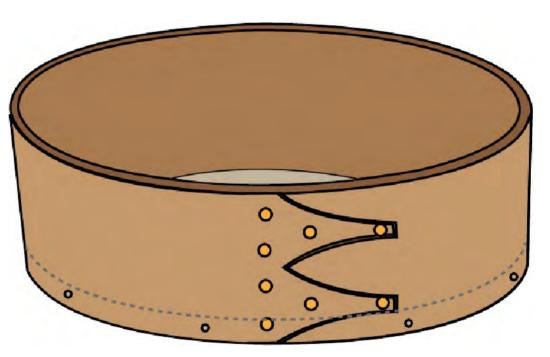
Mark the Band. Make a pencil mark where the pieces overlap.
